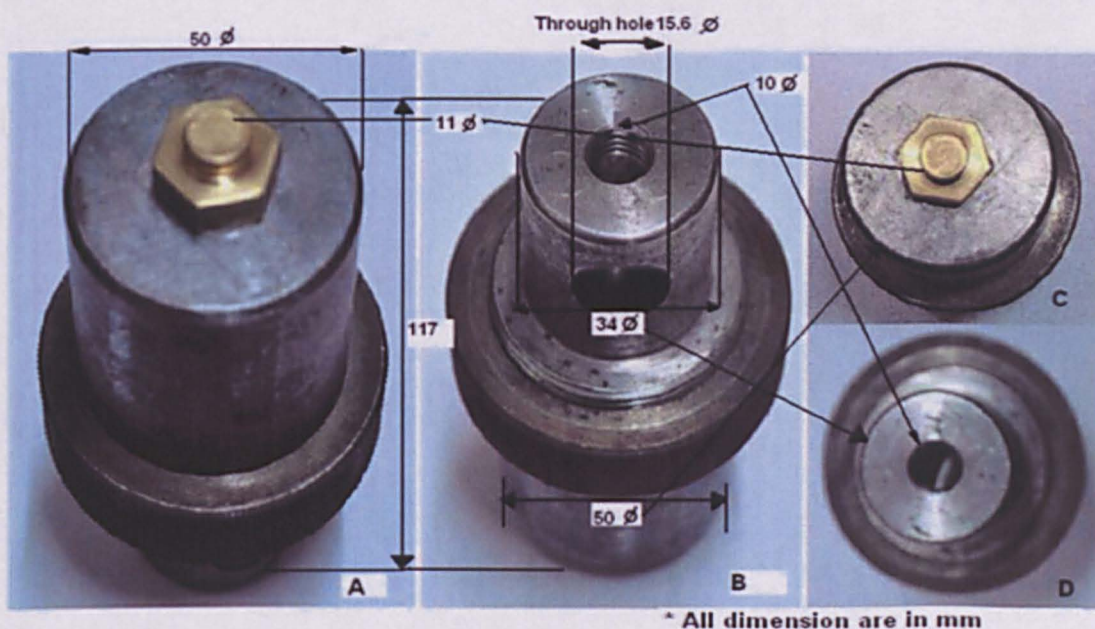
Piezoresistive sensor (Flexiforce®) calibration compressive loading tool with important dimensions. (A) 3D view from the top (B) 3D view from the bottom (C) View from the top (D) View from the bottom.
